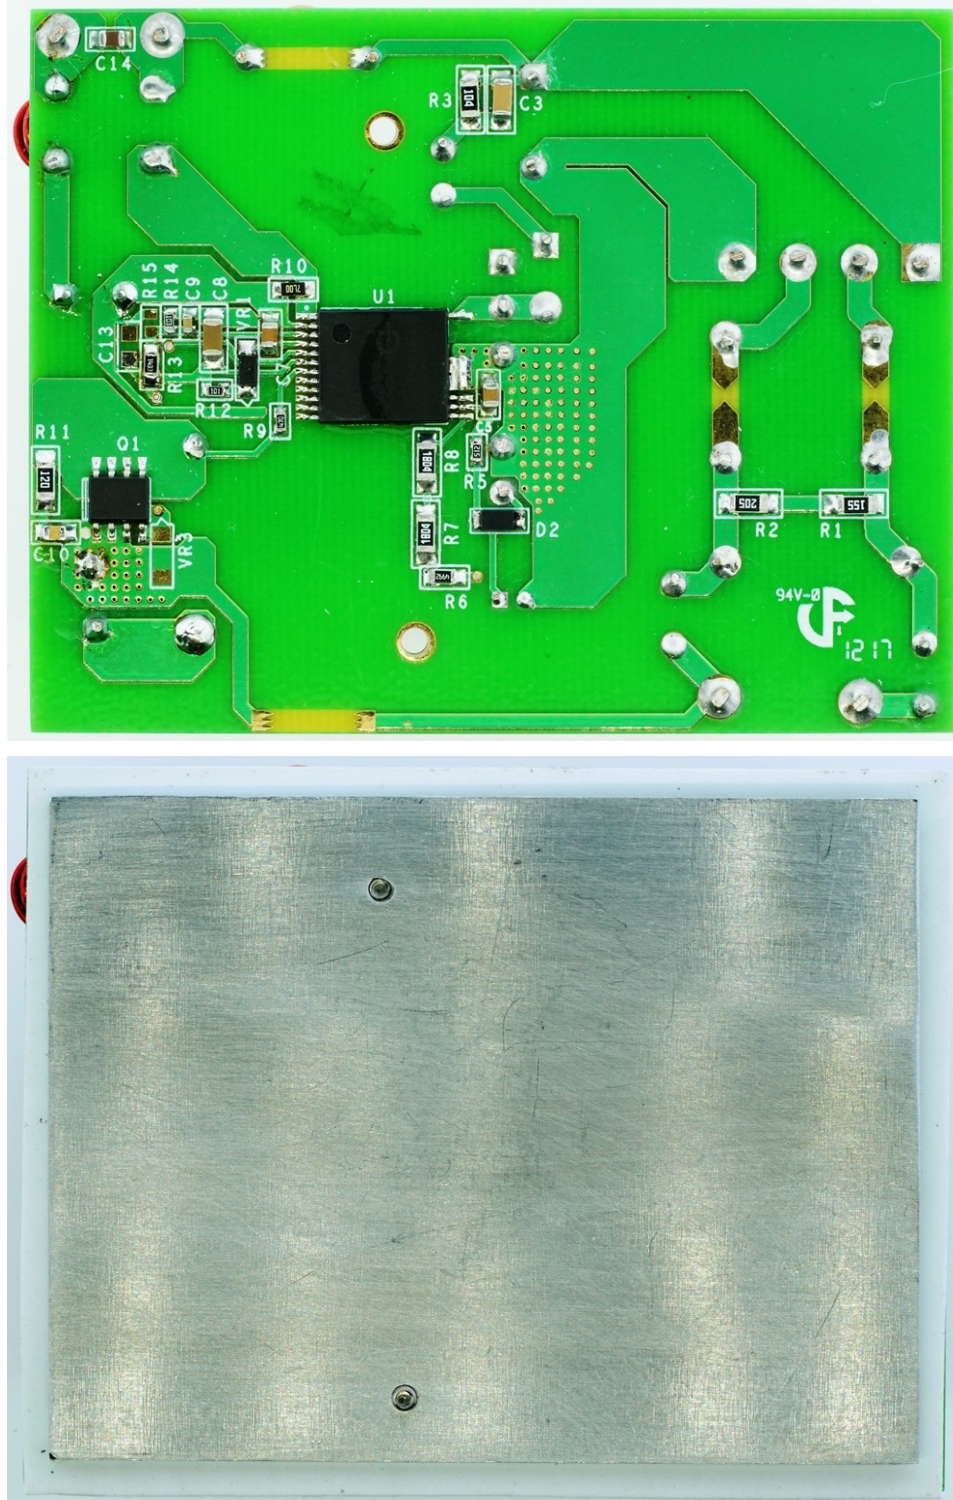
Populated Circuit Board Photograph, Bottom with Heat Spreader.
